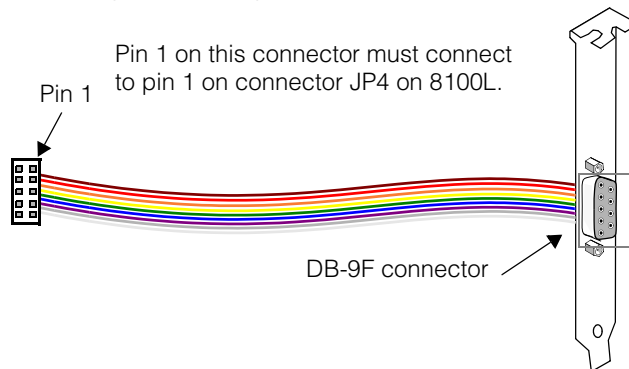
Trigger and strobe expansion panel (P/N 800-0062)
